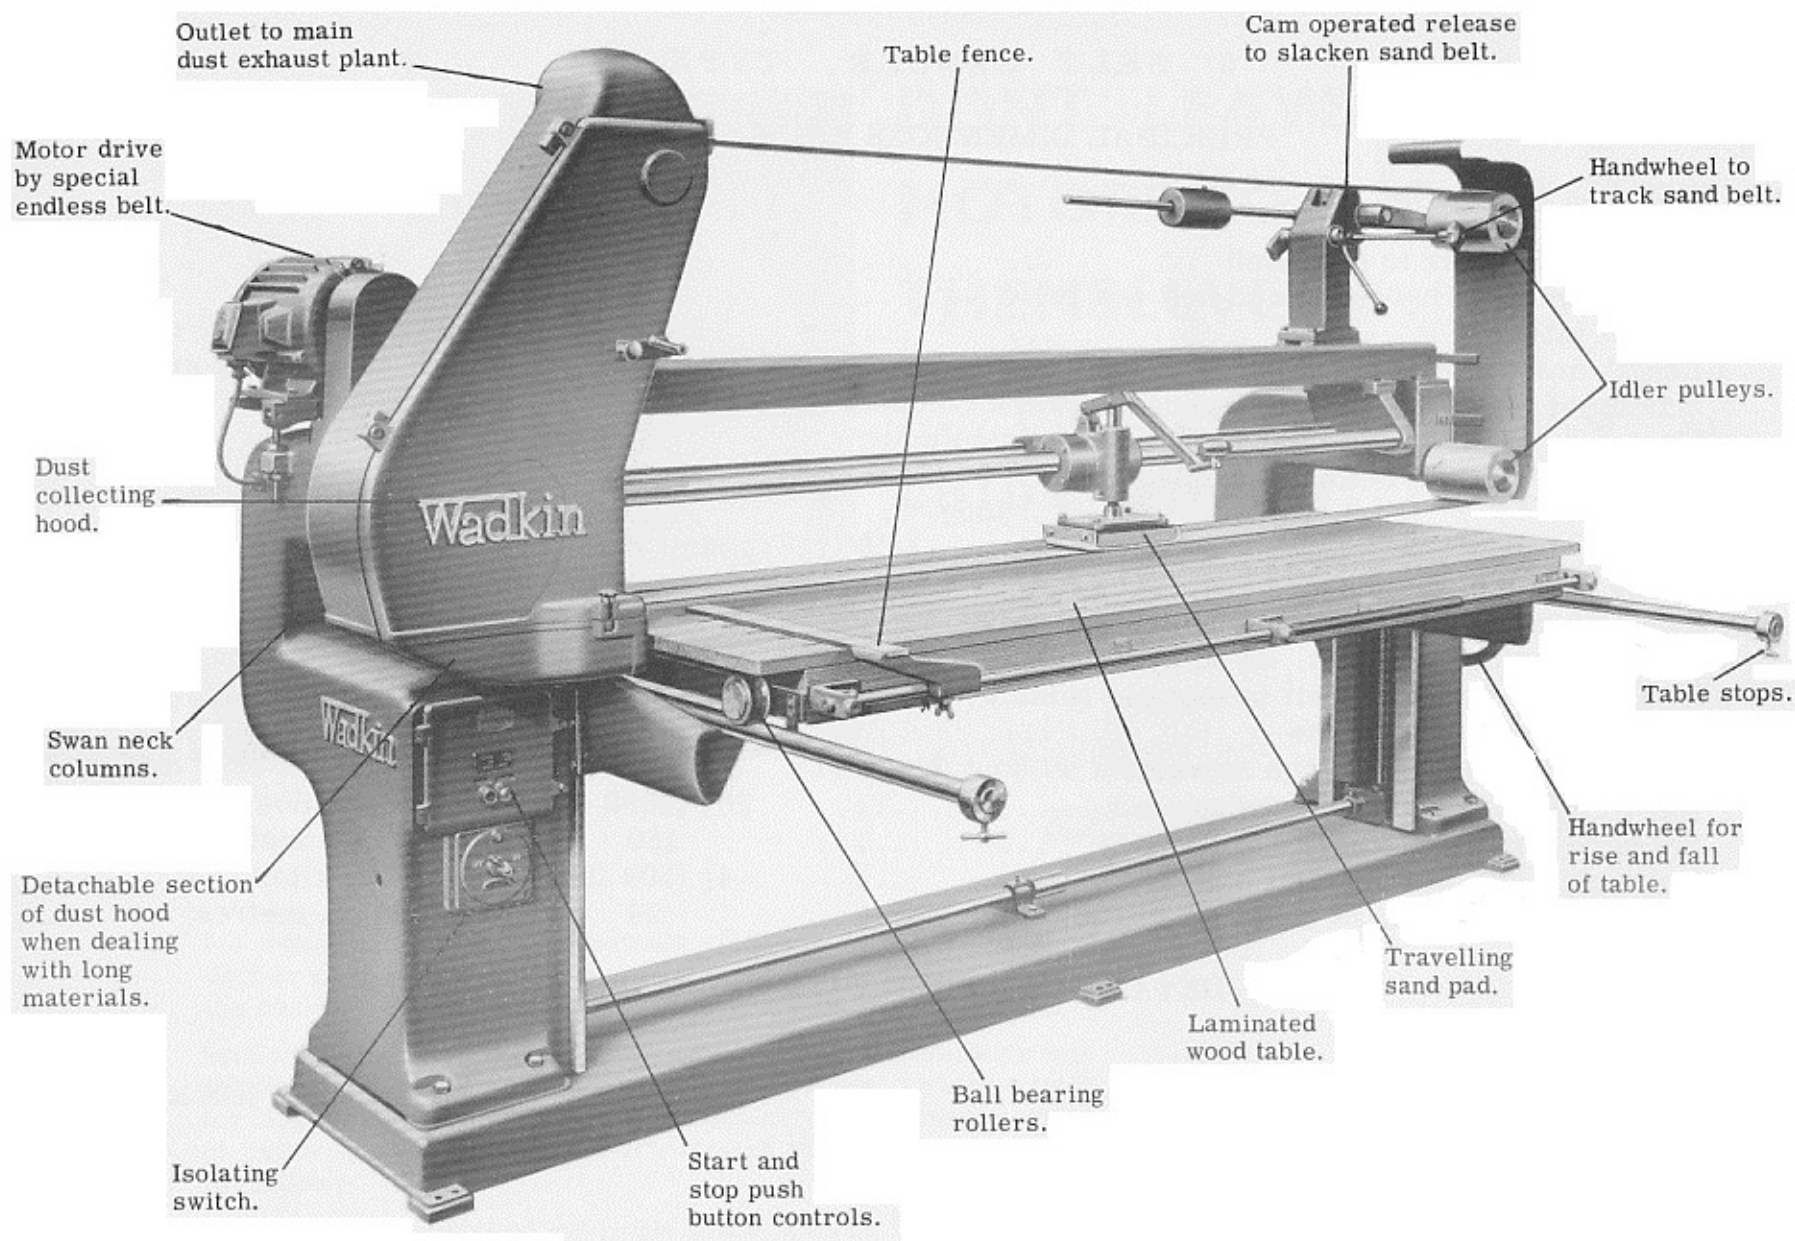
GENERAL VIEW OF 6" BELT SANDER, TYPE G. Z.
